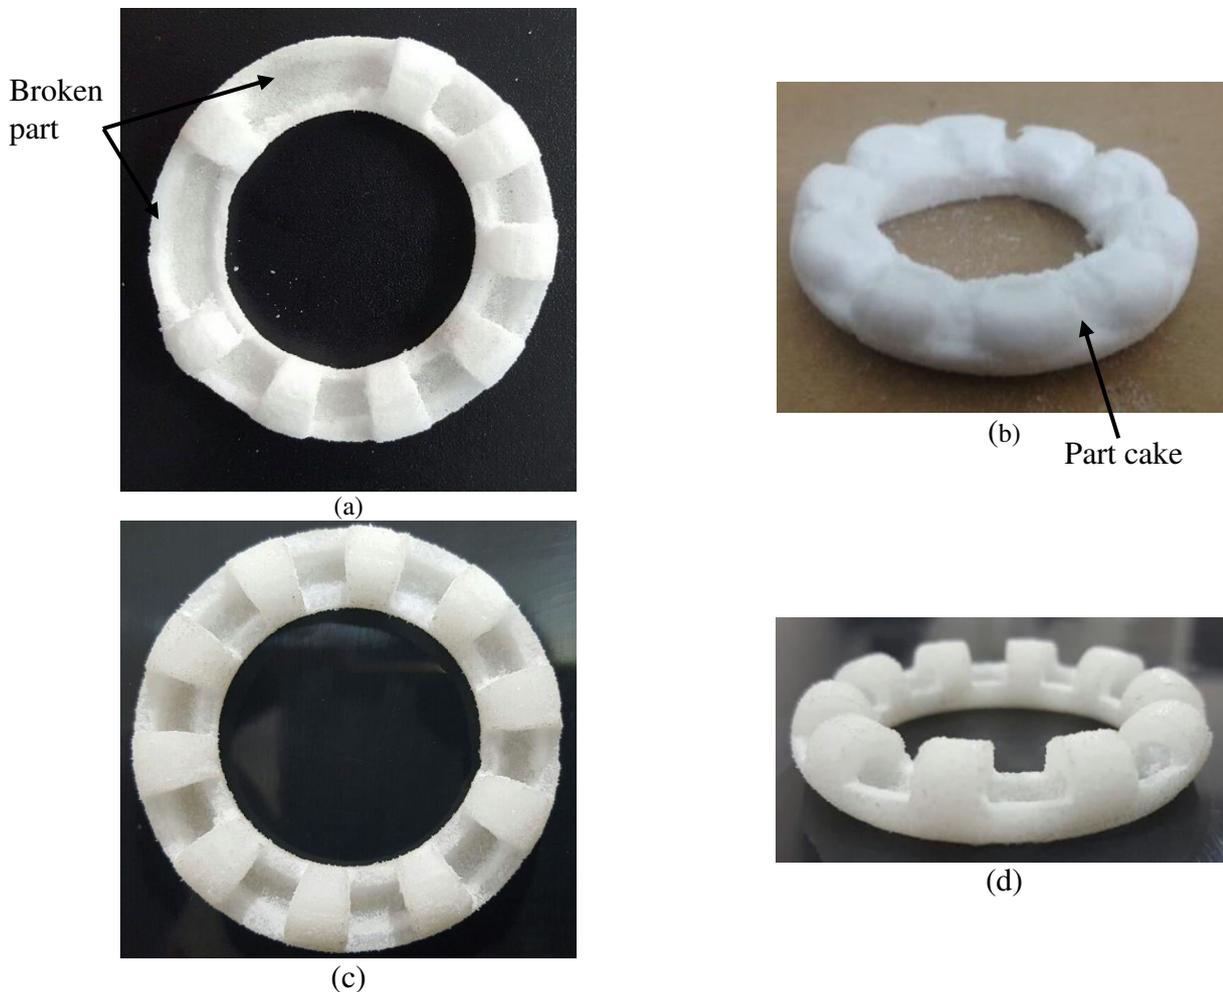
Examples of printed torus that resulted: (a) weak; (b) formed part cake; (c) and (d) good torus.
